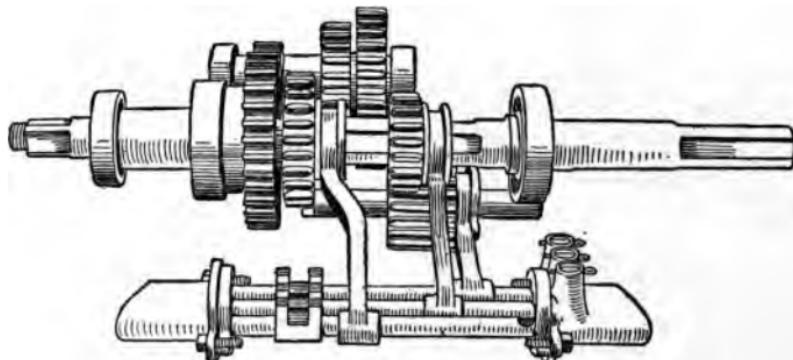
View of a selective sliding gear transmission, showing the sliding selecting rods and arms for sliding the single spur gears on the squared or splined shaft, into mesh progressively with gears on the opposite or second shaft. The gear attached to the arm on the outer selecting rod is shown brought to the position of engaging the clutch on the engine, or clutch, shaft and thus giving the direct drive to the rear wheels by holding the splined portion of the shaft into rigid union with the main driving member and the differential on the rear axle.
